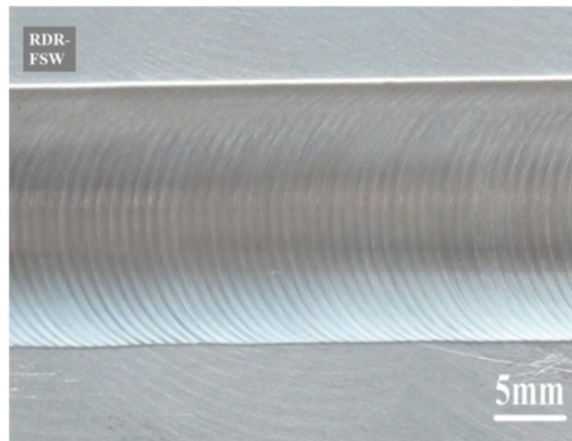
Weld joint obtained from RDR-FSW [132].
